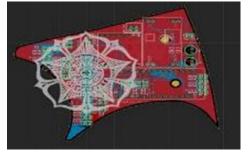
Layout PCB smart massage tools. Source: personal documents.
